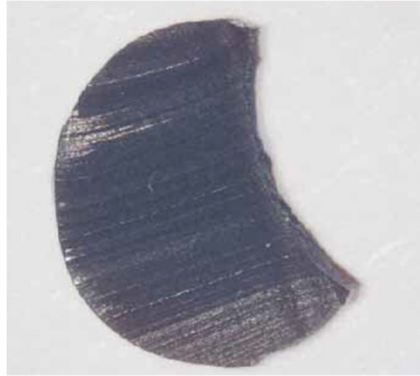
View of an O-Ring section sealing a plasma chamber, removed after 26% weight loss
